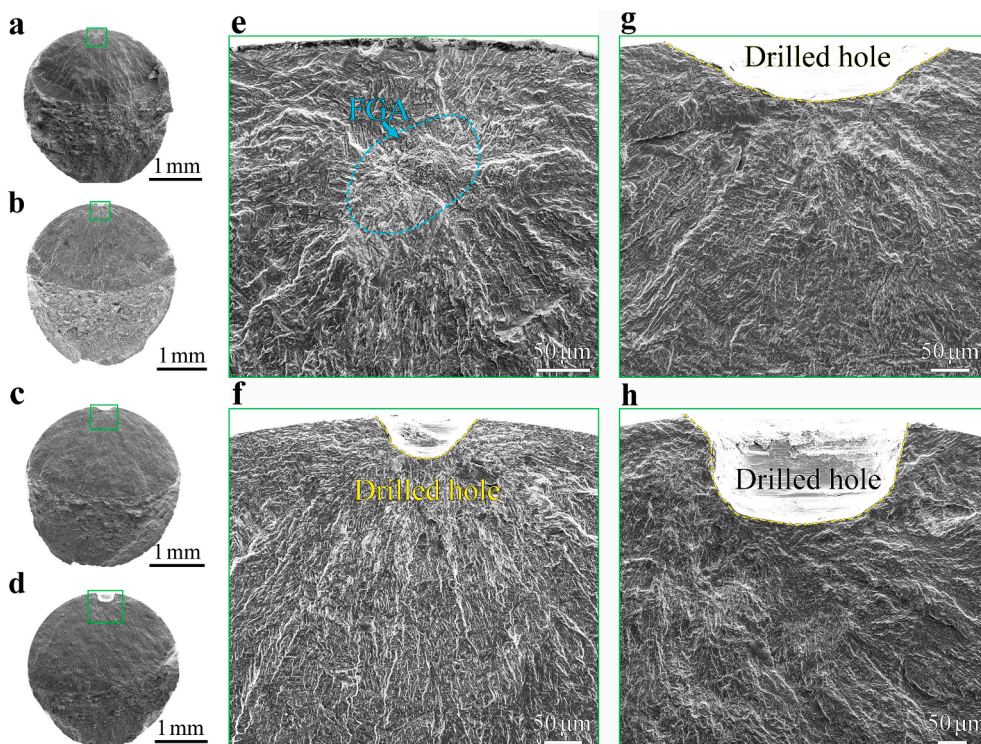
Fatigue fracture surface morphology of non-HIP specimens. (a) and (e): smooth specimen,  $\sigma_a = 600$  MPa,  $N = 2.76 \times 10^6$ ; (b) and (f): smooth specimen,  $\sigma_a = 550$  MPa,  $N = 1.53 \times 10^7$ ; (c) and (g): specimen with artificial surface defect,  $\sigma_a = 450$  MPa,  $N = 1.39 \times 10^8$ ; (d) and (h): specimen with artificial surface defect,  $\sigma_a = 500$  MPa,  $N = 2.82 \times 10^5$ . (a)-(d): the whole morphology of fatigue fracture surface; (e)-(h): close-ups of the rectangular regions in (a)-(d), respectively.
